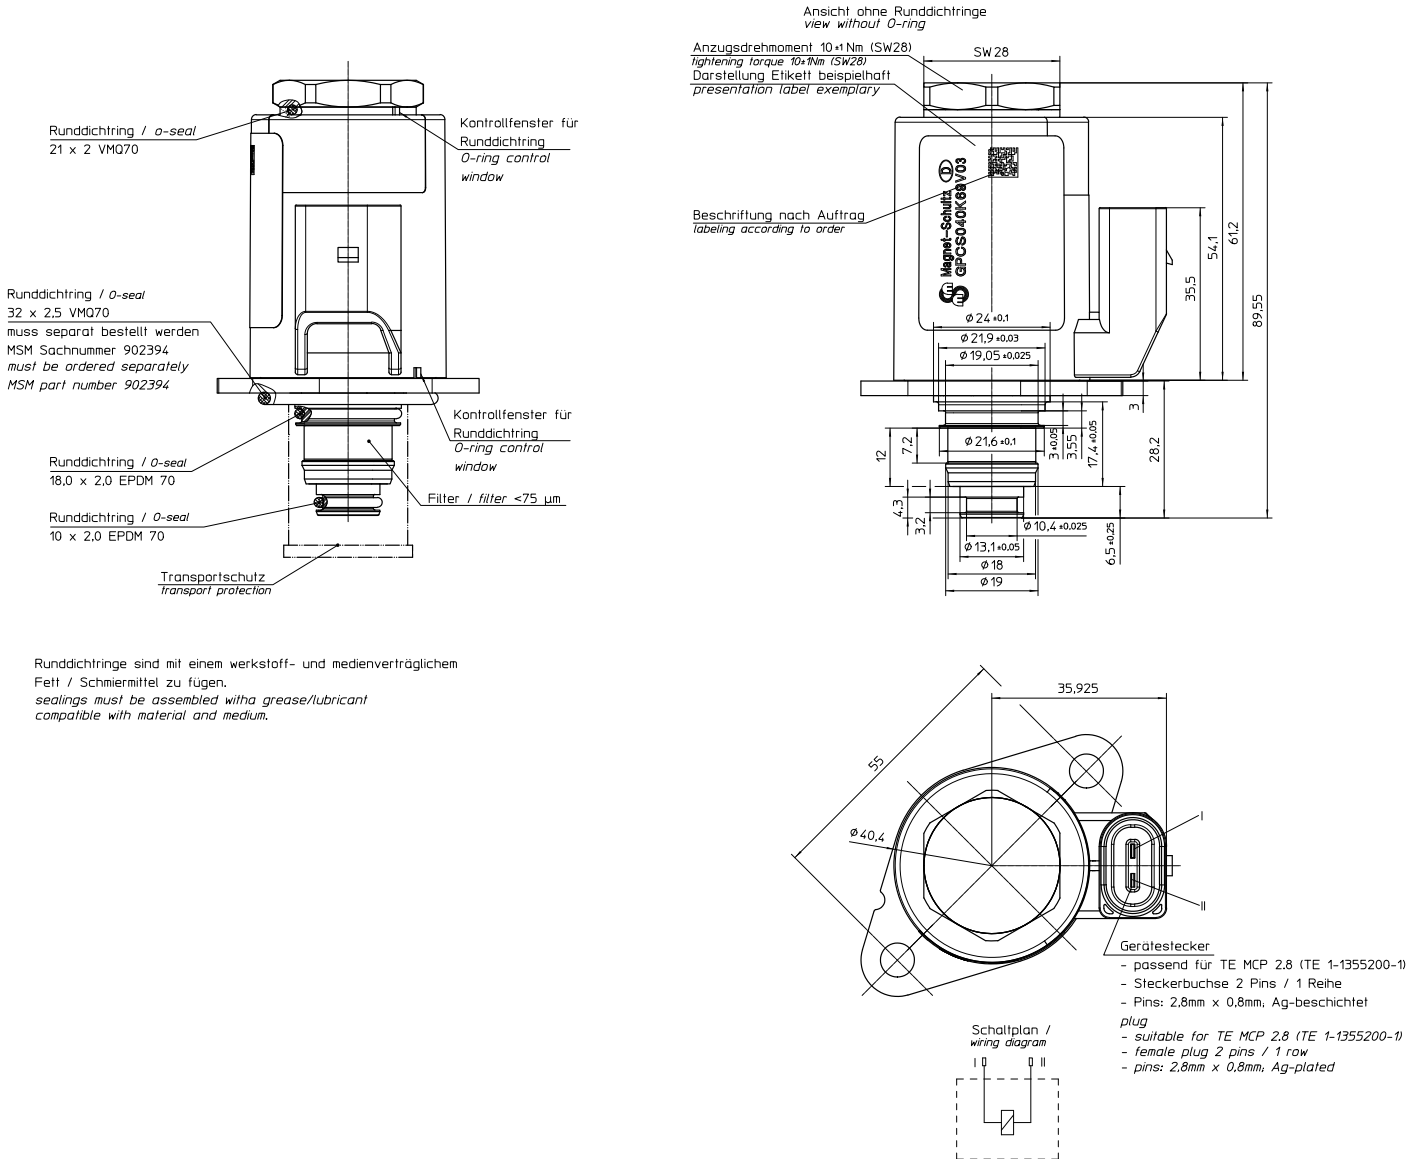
Type G PC S 040 K69 V03 (G013919 Index g)
